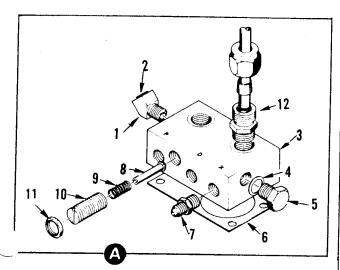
Exploded View of Models 5013-19 and -22 Hydraulic Power Unit and 5-20
